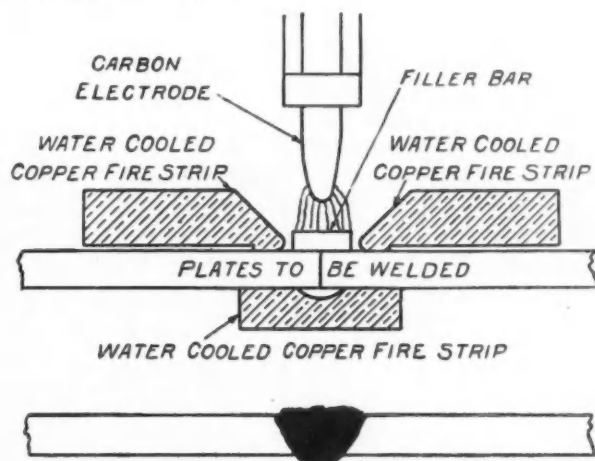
Diagrammatic View of old carbon electrode process of automatic arc welding.
